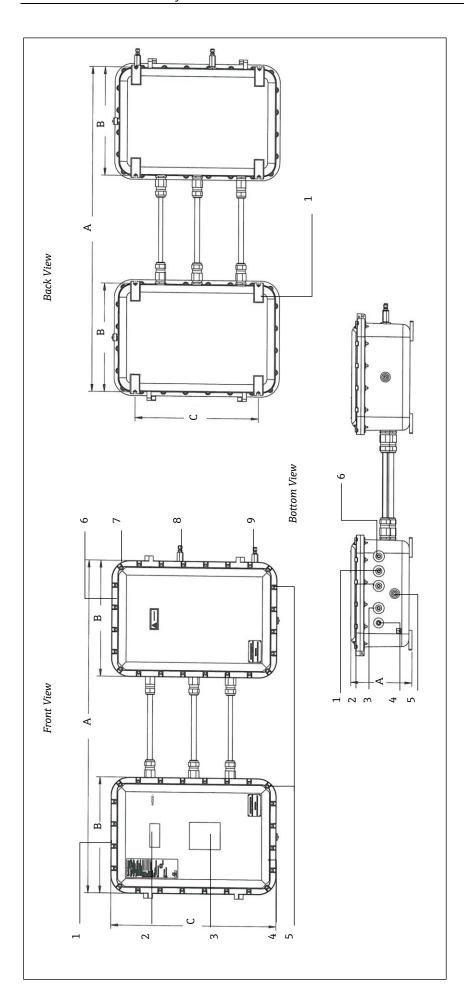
Dimensions and Mounting for Electronics and sample cell enclosures (cable-coupled configuration)
